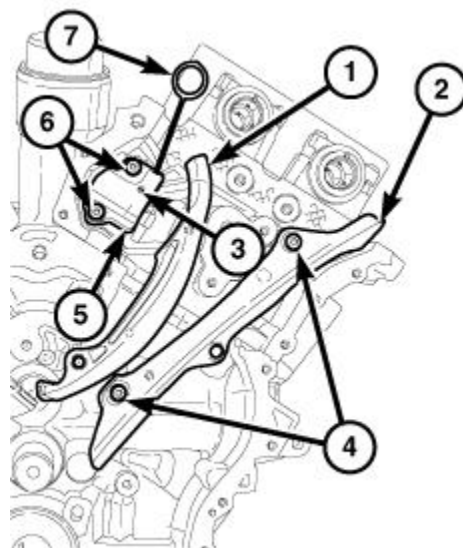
Left Cam Chain Tensioner, Arm, Guide & Bolts
